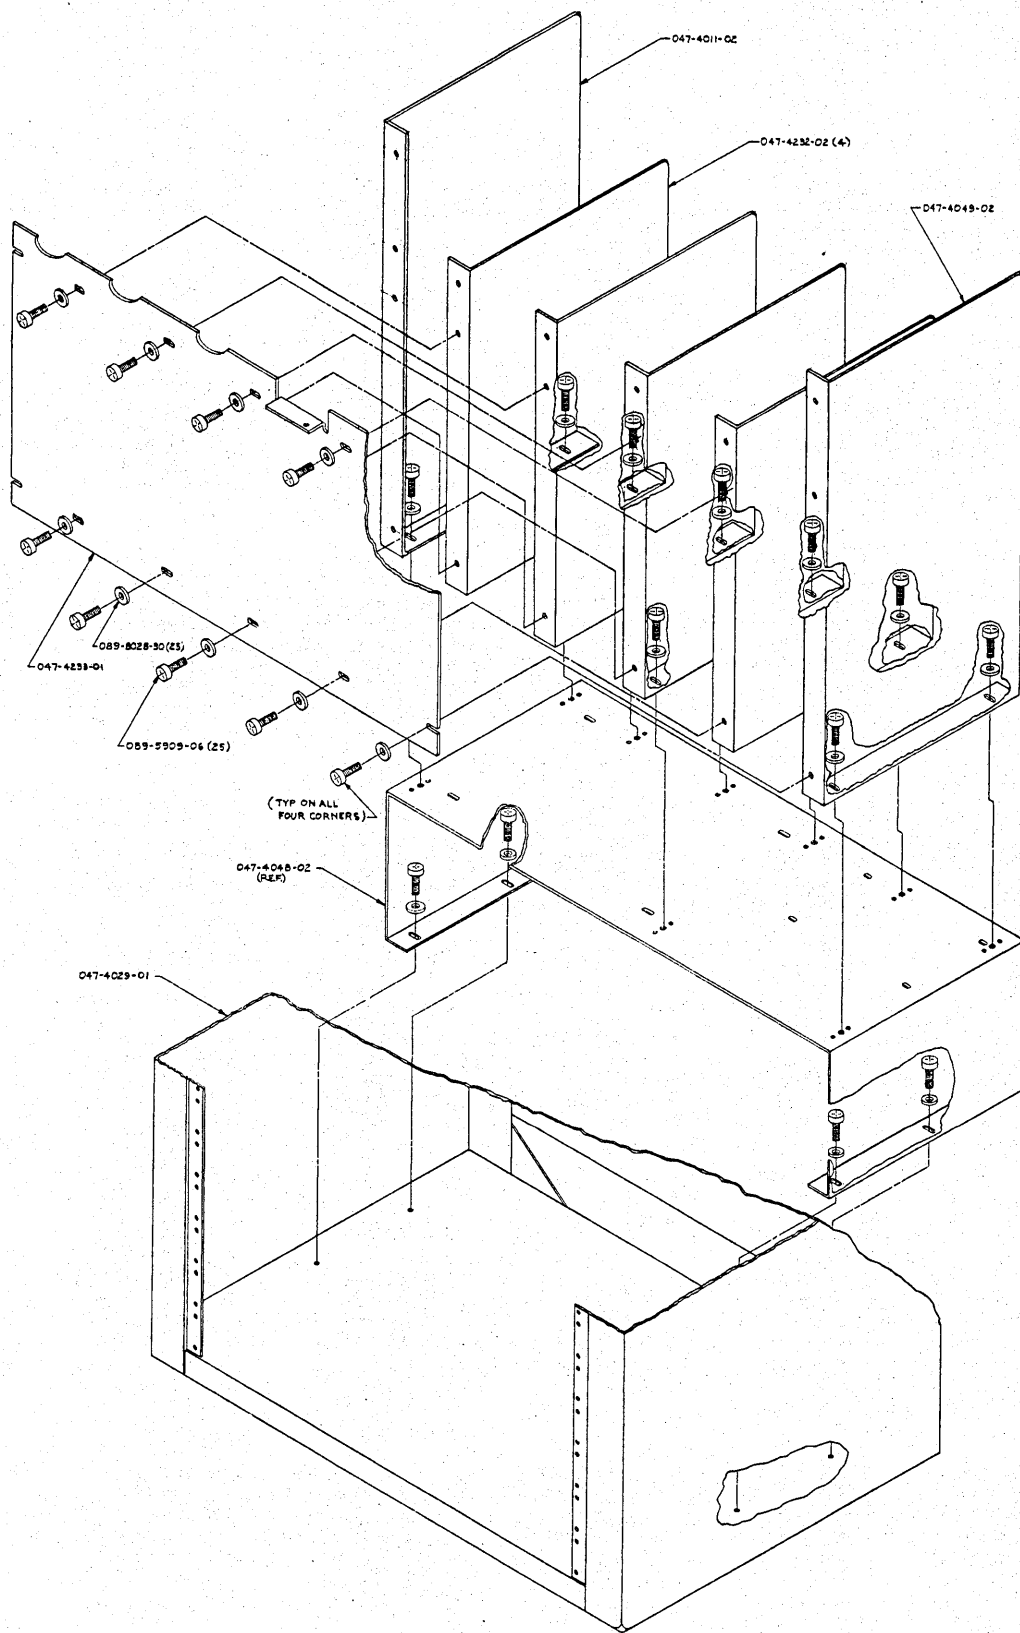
CHASSIS ASSEMBLY (SHEET 2)
